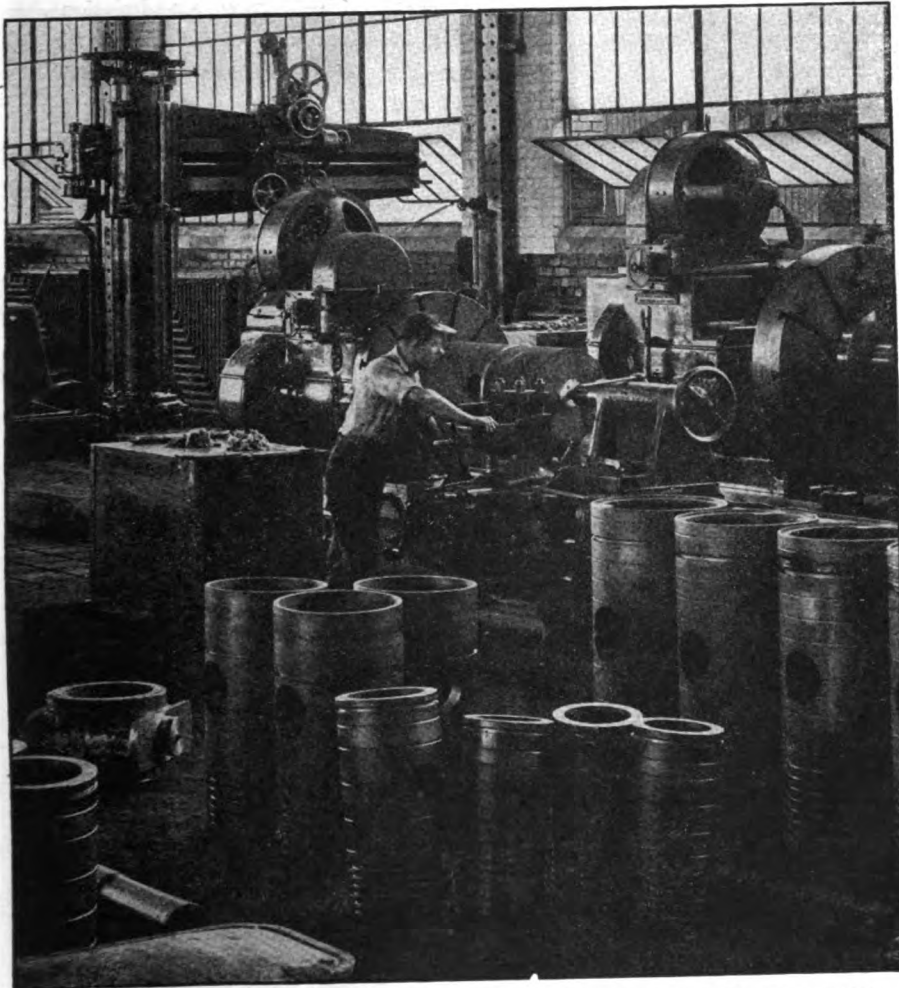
PISTONS ARE ROUGHED OUT ON THE LATHE BEFORE GRINDING
